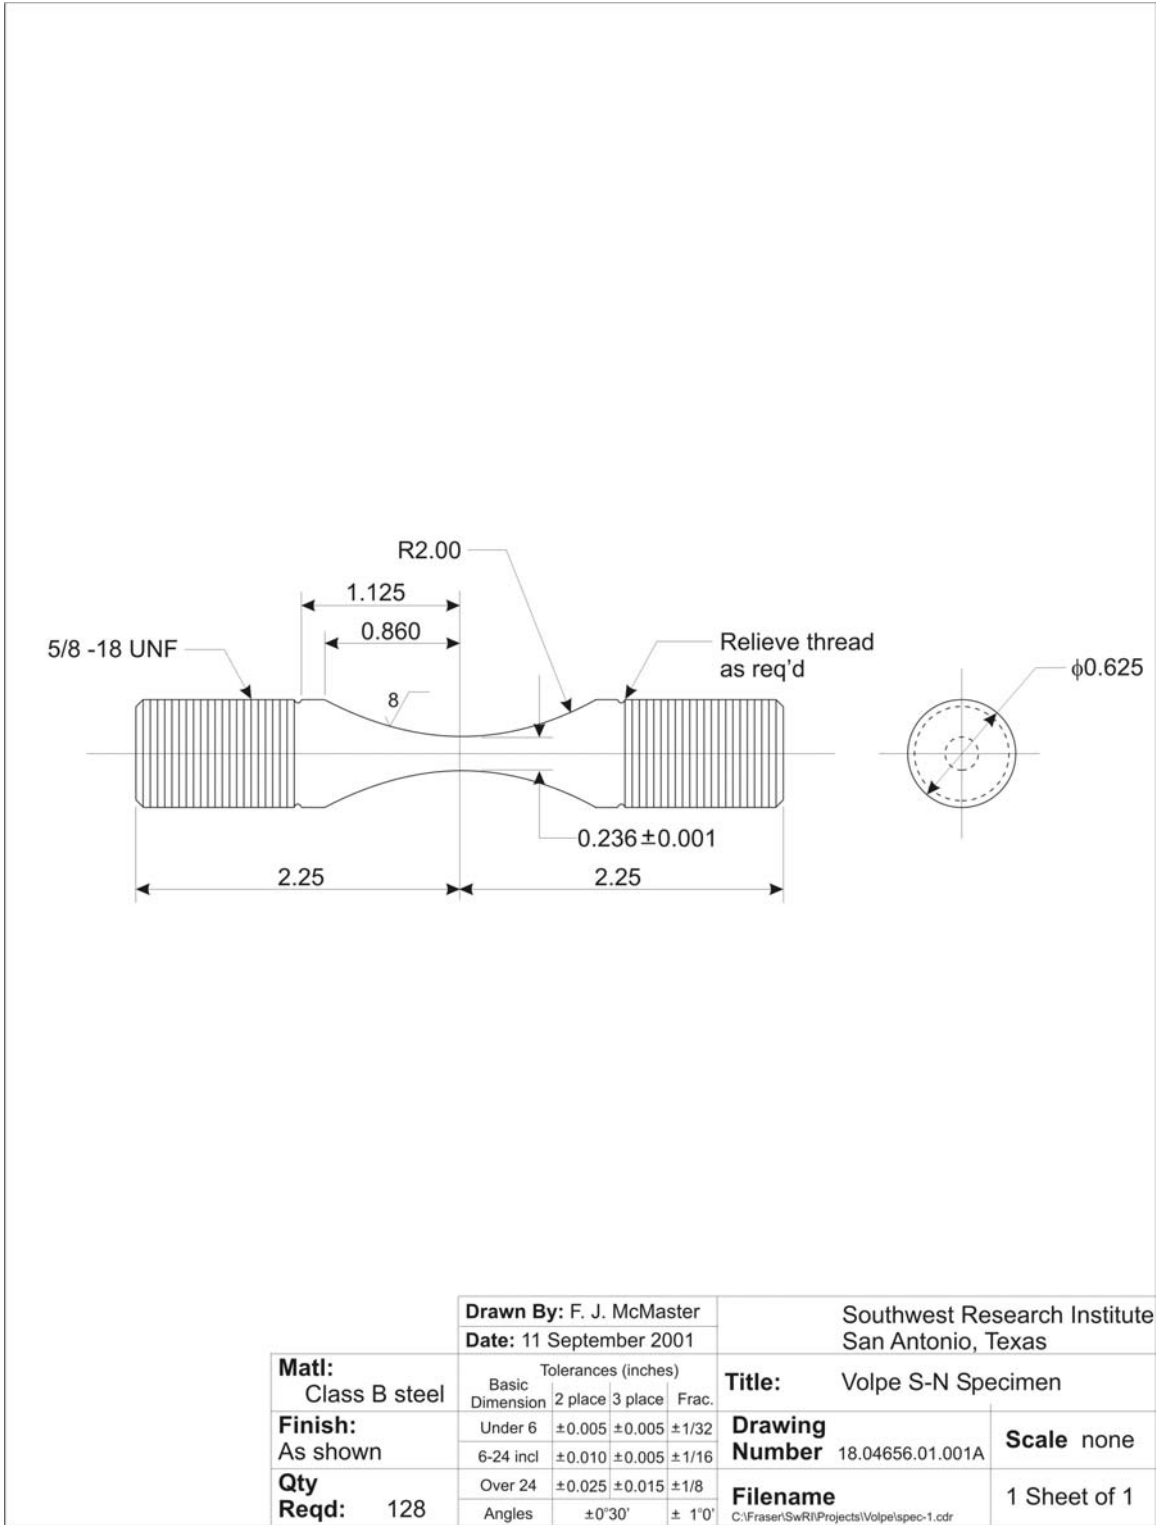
Design Drawing for the Hourglass Fatigue Specimen
